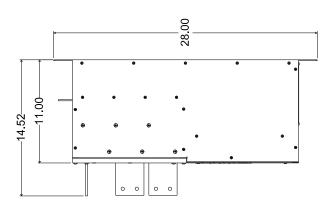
M3452 M14 Chassis Dimensional Outline Drawing
